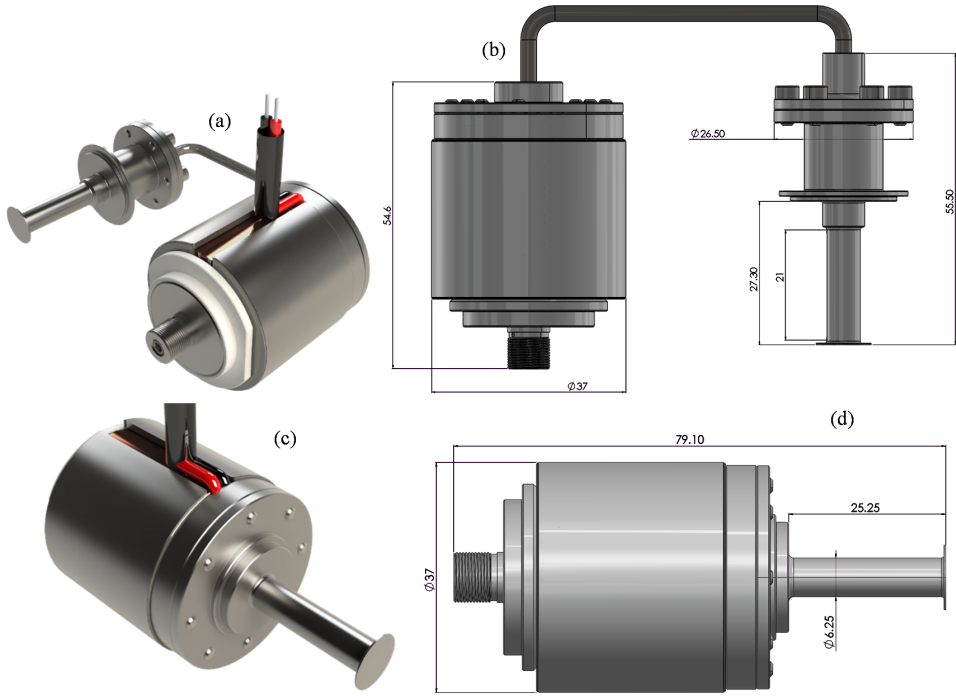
CAD rendering and outline dimensions of split (a,b) and integral (c,d) prototypes (Ver. 2)
